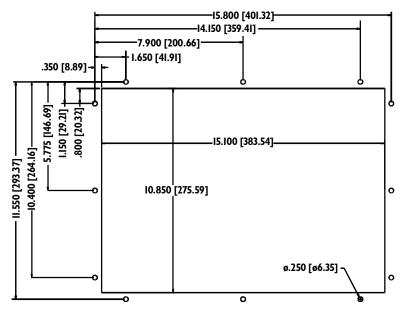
3510KP/3512KP System Cutout Dimensions (inches [mm])
